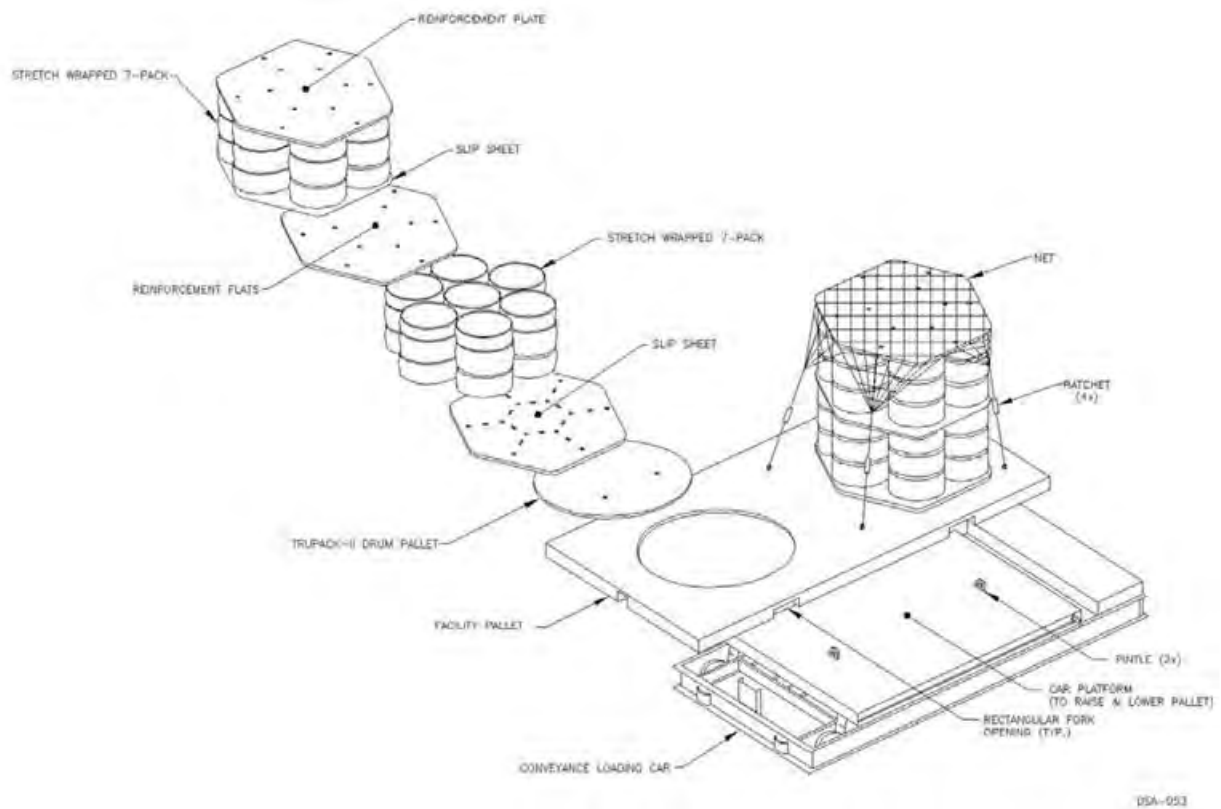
Facility Pallet on Conveyance Loading Car
